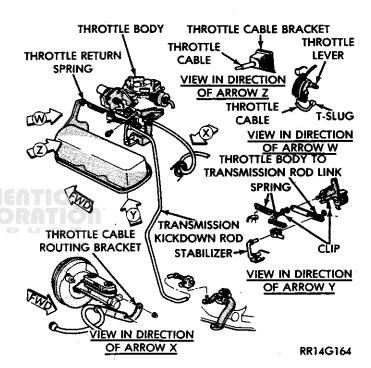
Throttle Cable Attachment – 5.2L and 5.9L Engine
